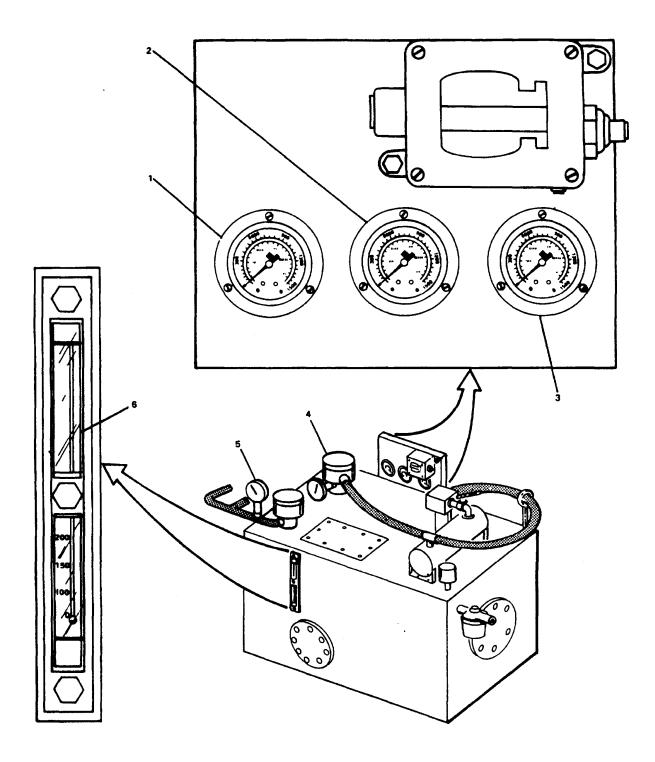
Tow Winch Hydraulic Oil Sump.
